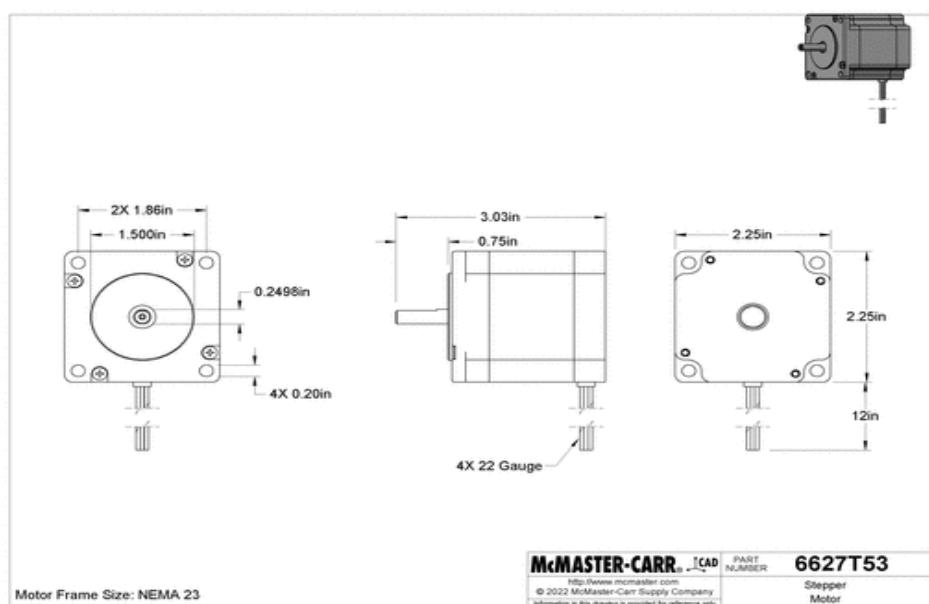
Drawing with Specification for the NEMA 23 Stepper motor [37]
